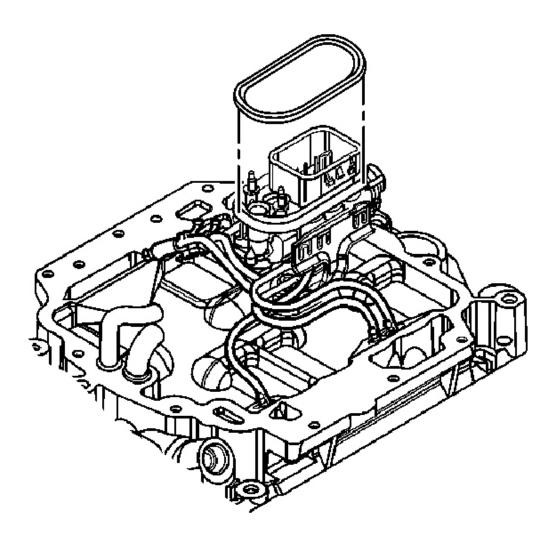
Fuel Meter Body O-Ring Seal Courtesy of GENERAL MOTORS CORP.
